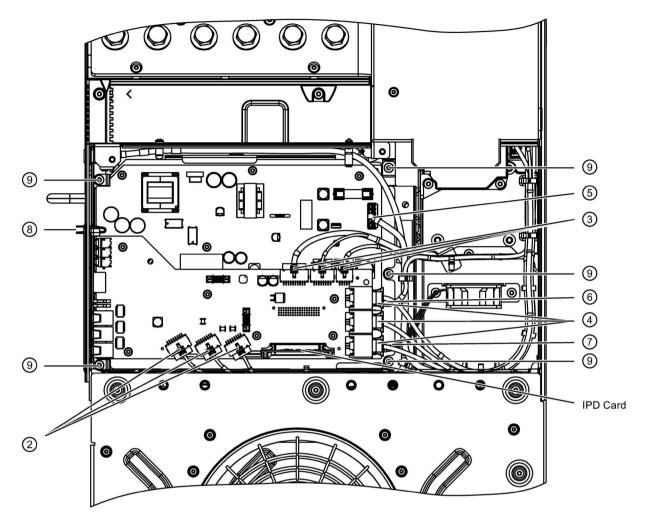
Replacing Control Interface Module, Active Line Module and Motor Module Chassis-2, frame size FS2, FS2+, FS4, FS4+ Part 2
